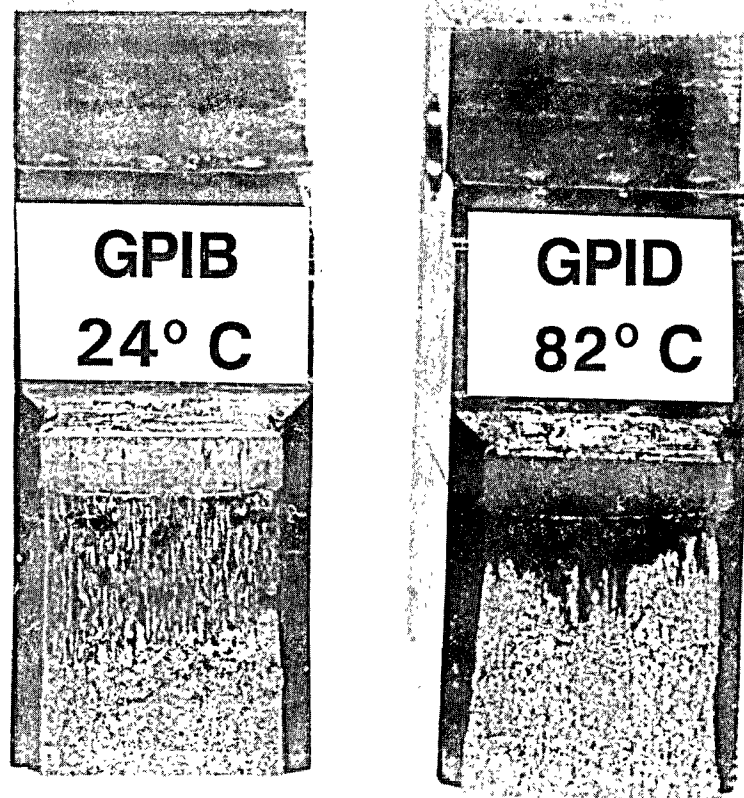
The fracture surfaces for the additional tests at 24°C and 82°C.
